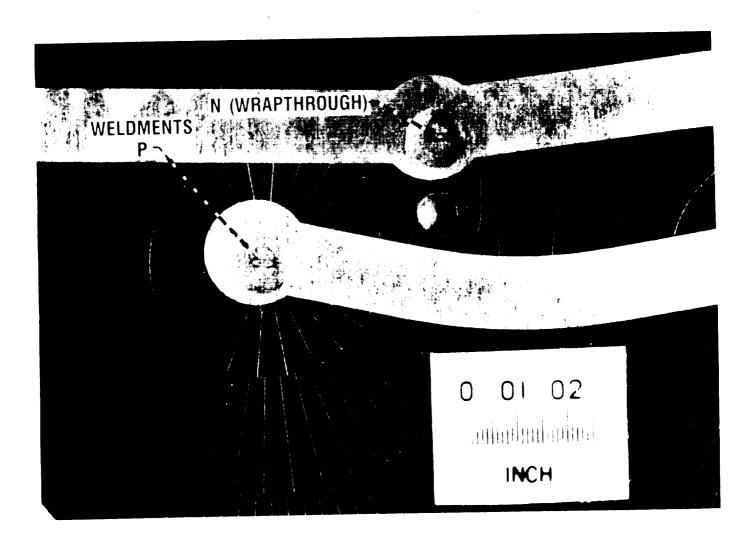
Close-up view of copper interconnect weld contact points, shown is one P-weld and one N-weld contact.
